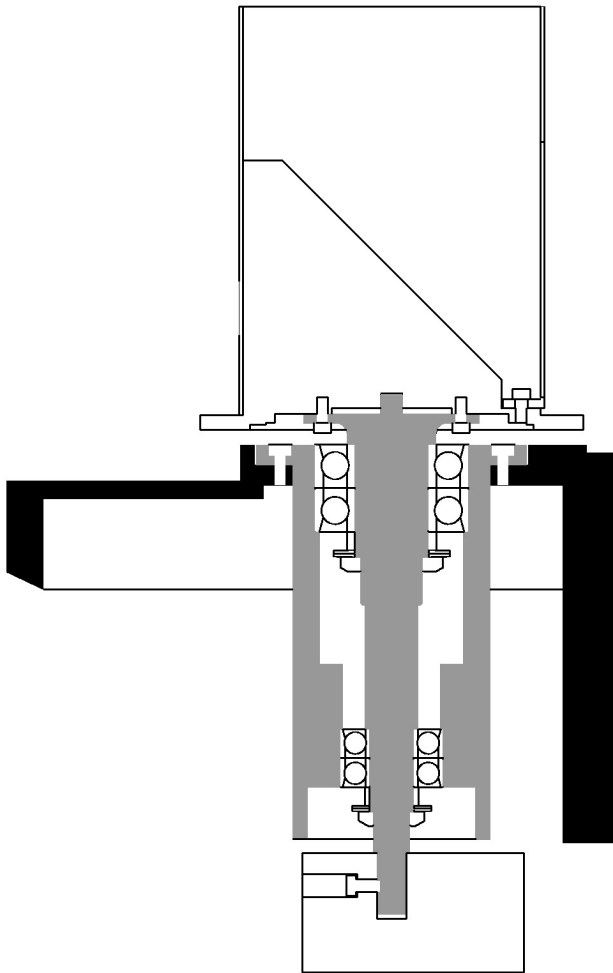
Cross section of beam steerer bearing assembly. The steel shaft and bearing housing are shown in gray, while the mechanism mount is shown in black.
